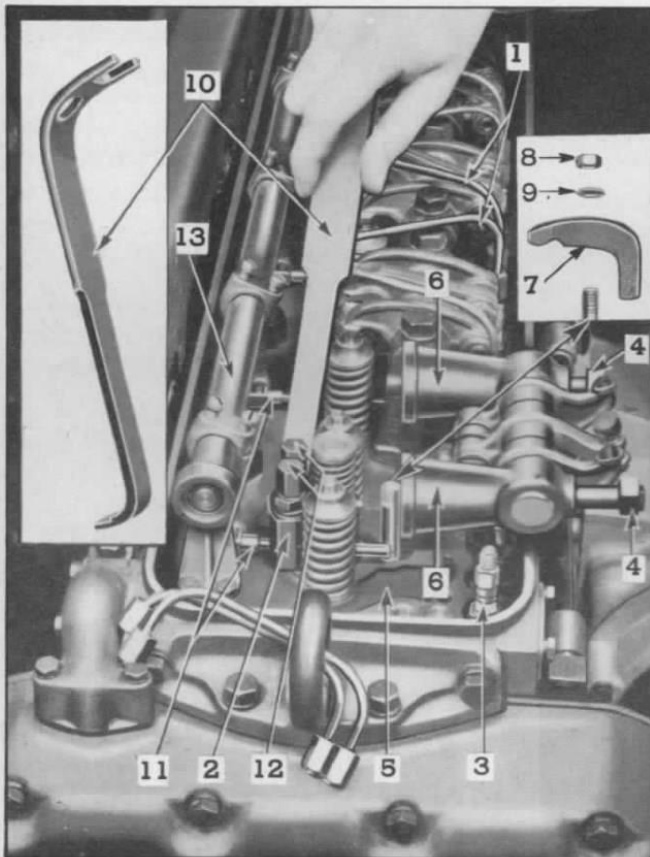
Removing Injector from Cylinder Head with Tool J-1227-1
